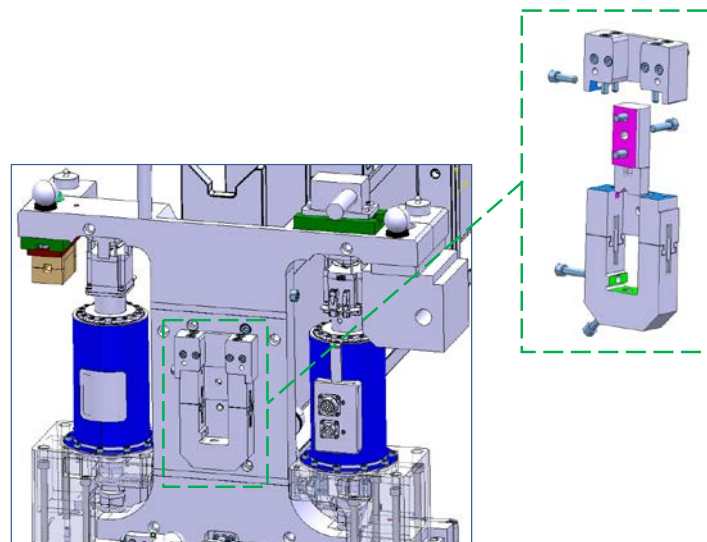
Schematic representation of the cradle assembly including actuators and alignment sensors
